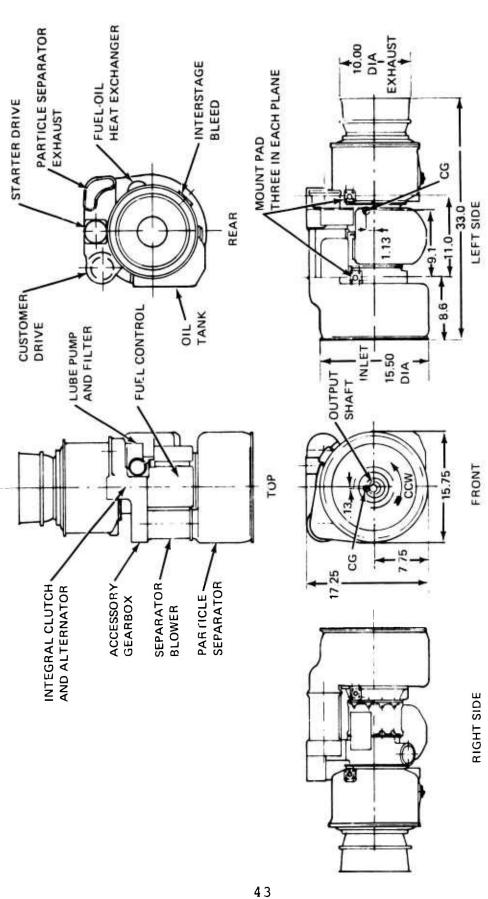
Three-View Installation Drawing of Advanced-Technology Engine.
